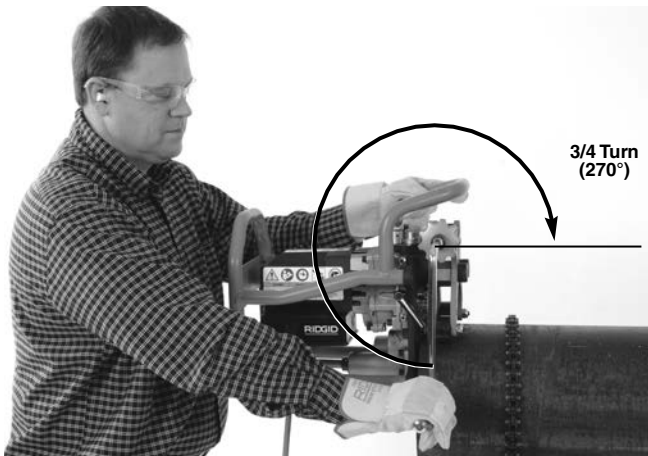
B – Tighten Clamp Screw Additional 3/4 Turn (270°)
